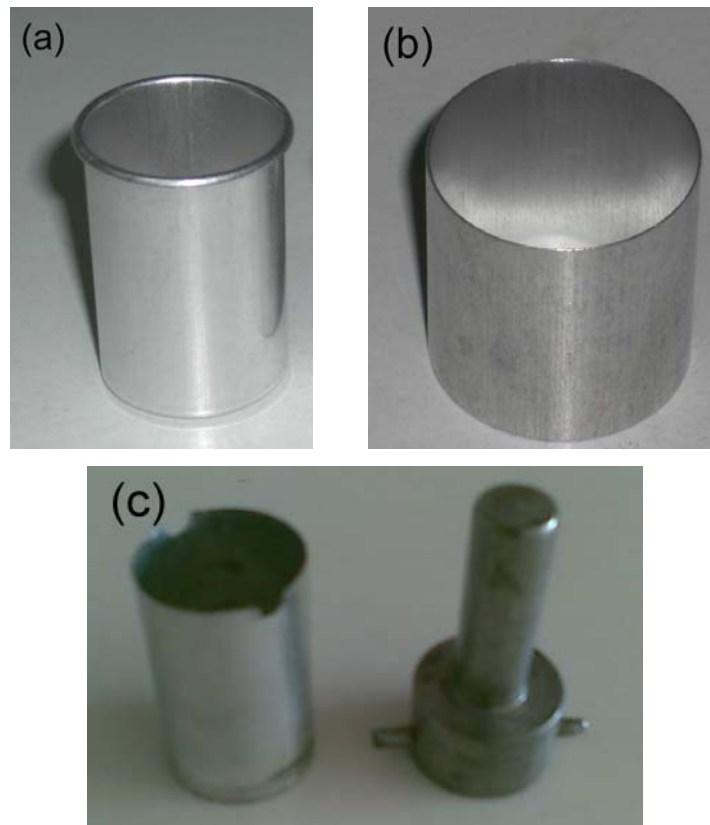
The empty tubes; (a) as-received, (b) after cutting process and (c) the cutting apparatus that was used to drill the honeycomb sheets
